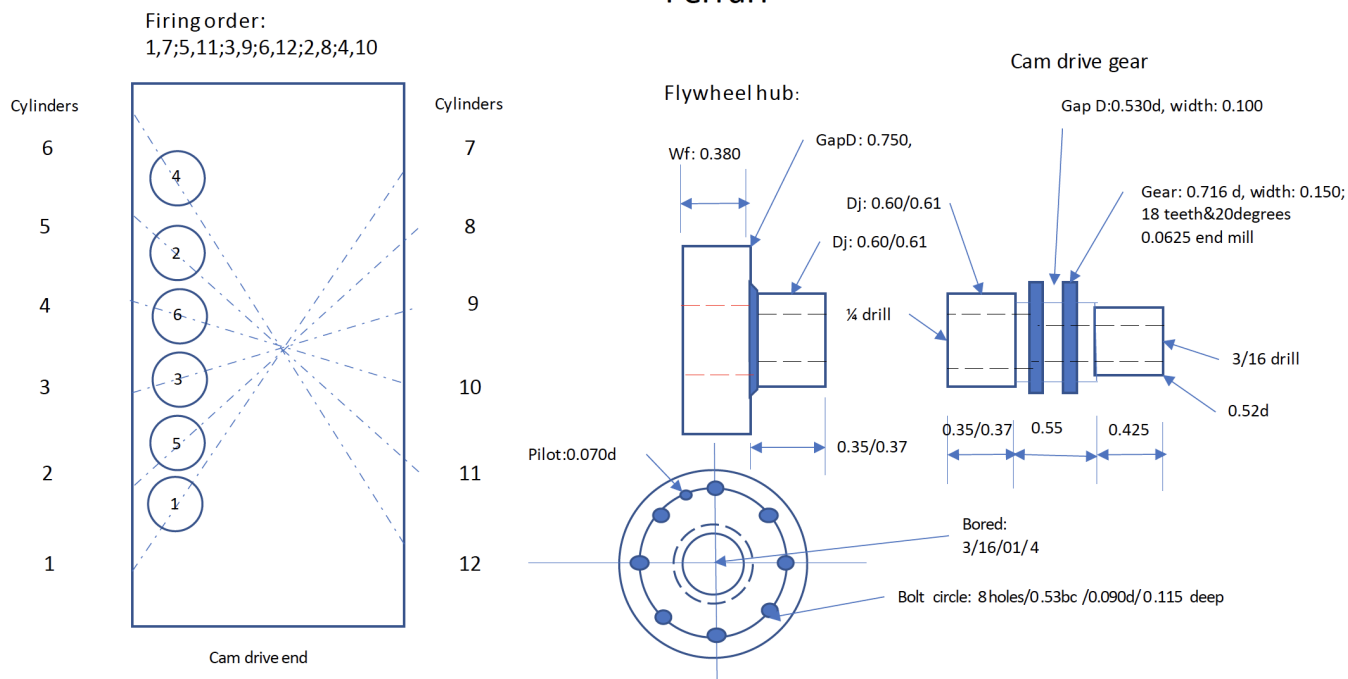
Ferrari flywheel hub and cam drive gear.
